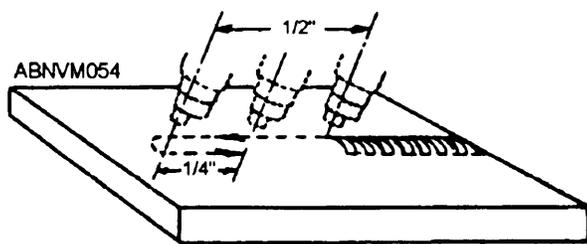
Reciprocating technique for GMA welding.
